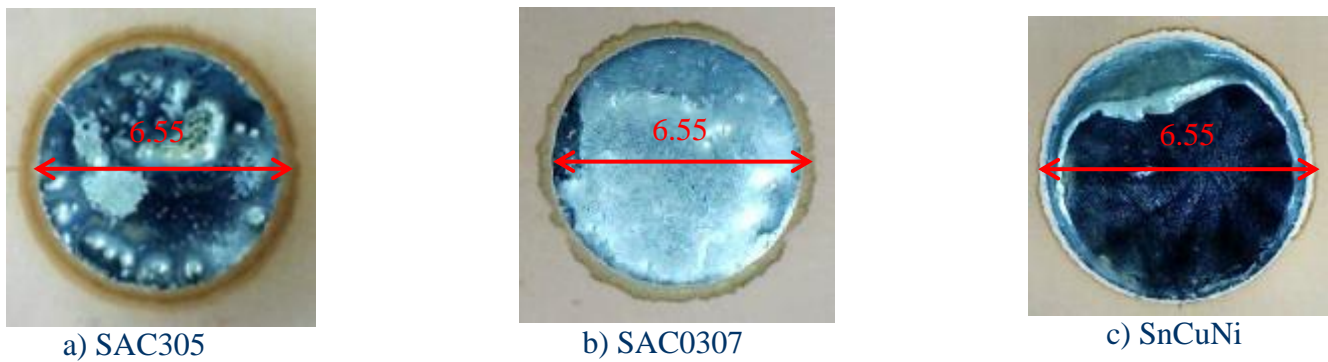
Wetting Test Results of Various Lead-Free Alloy Solder Pastes. The images of Wetting Test for a SAC305, SAC0307 and SnCuNi alloy solder paste were shown. These three solder pastes had on average a similar spreading diameter.
